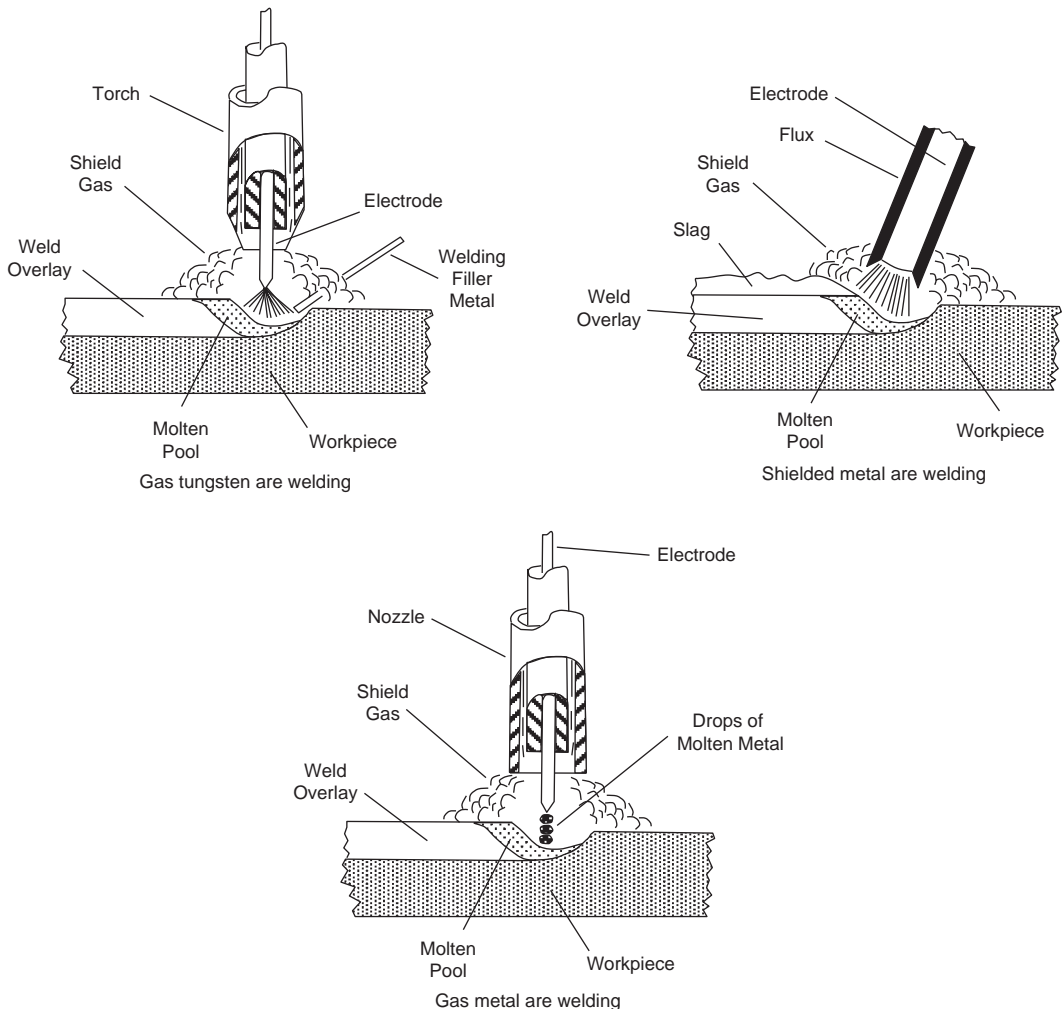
Welding processes used for hardfacing. Adapted from Ref 5
